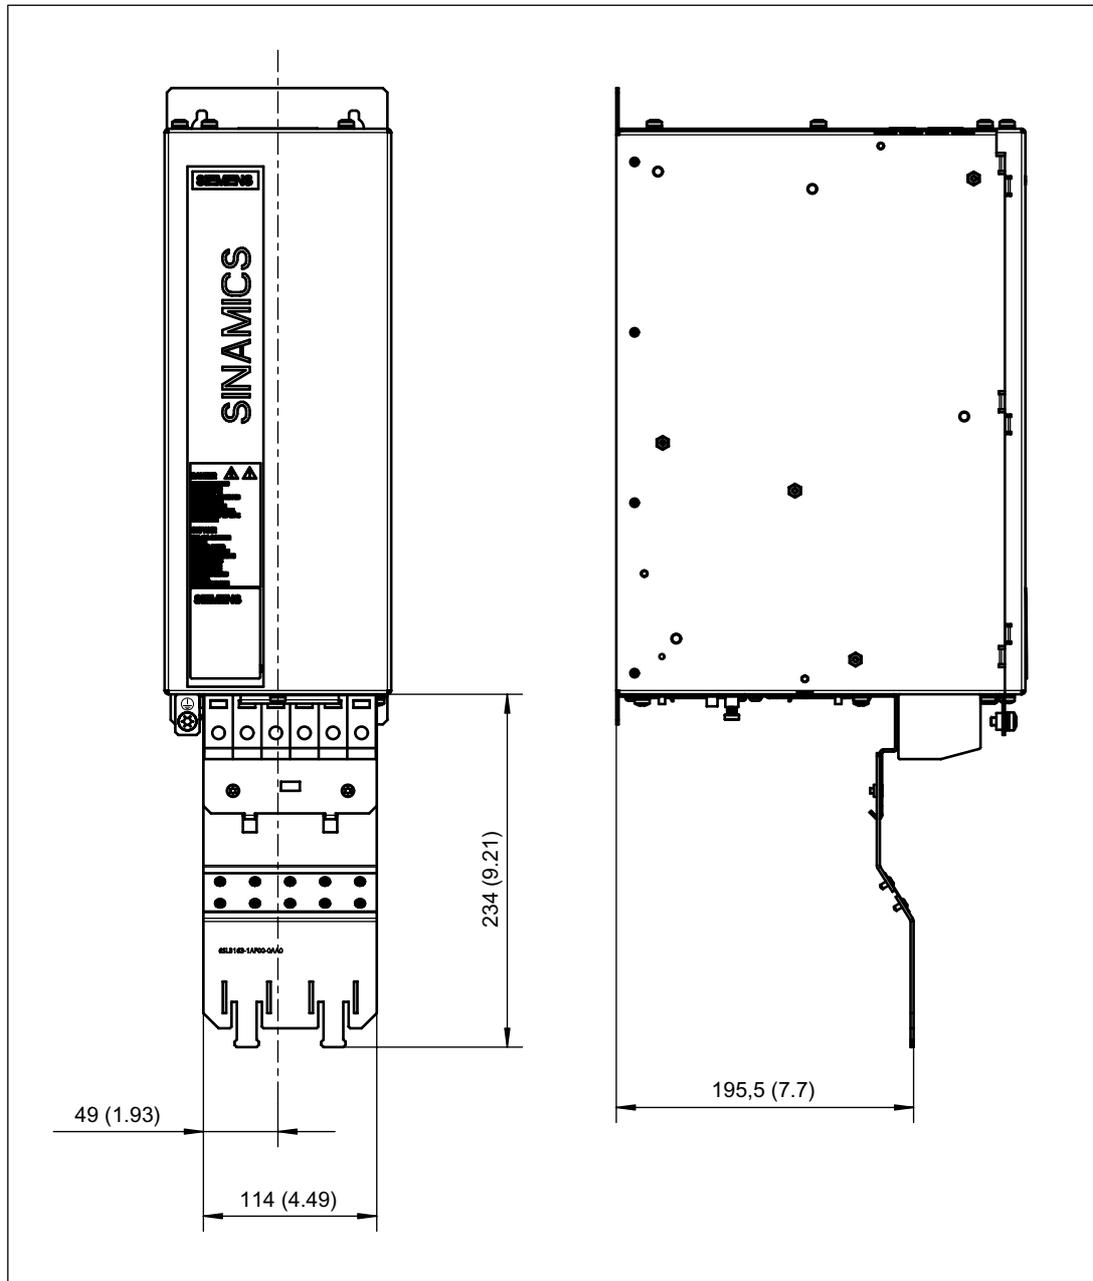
Dimension drawing of shield connecting plate on the 36 kW Active Interface Module, all dimensions in mm and (inches)
